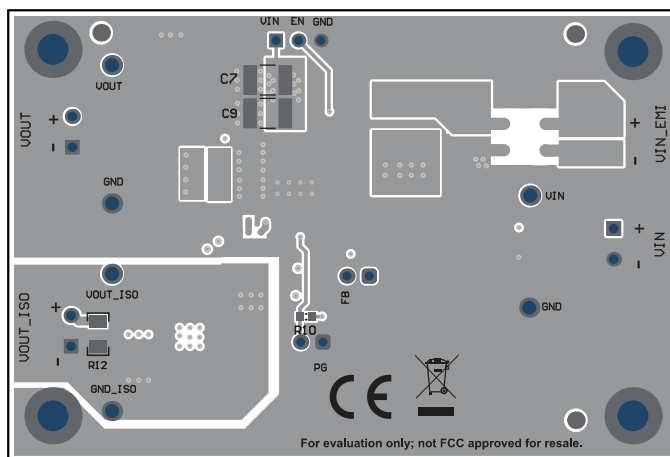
Bottom Layer Silkscreen (Bottom View)
